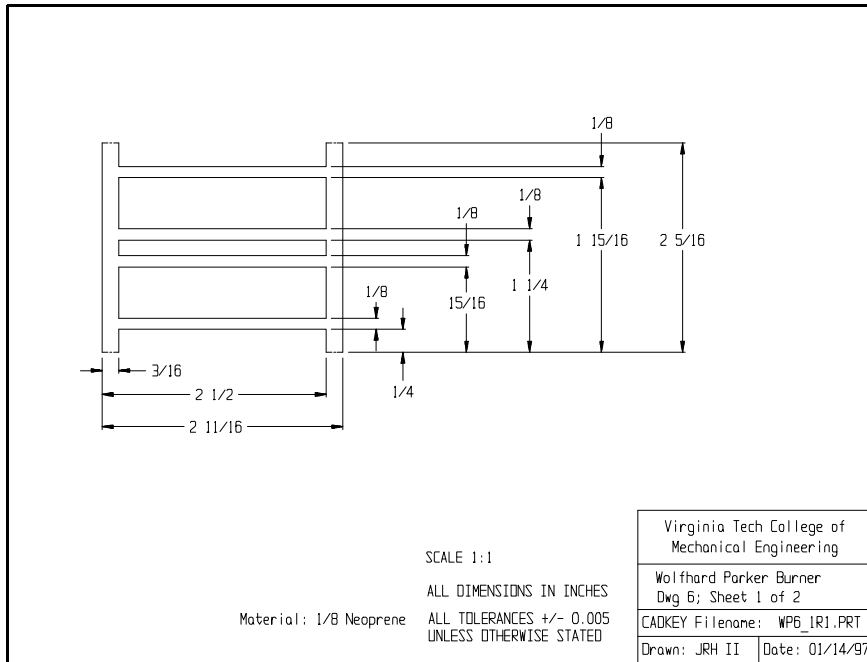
Burner Mounting Base Gasket, Drawing 6 Sheet 1 of 2
